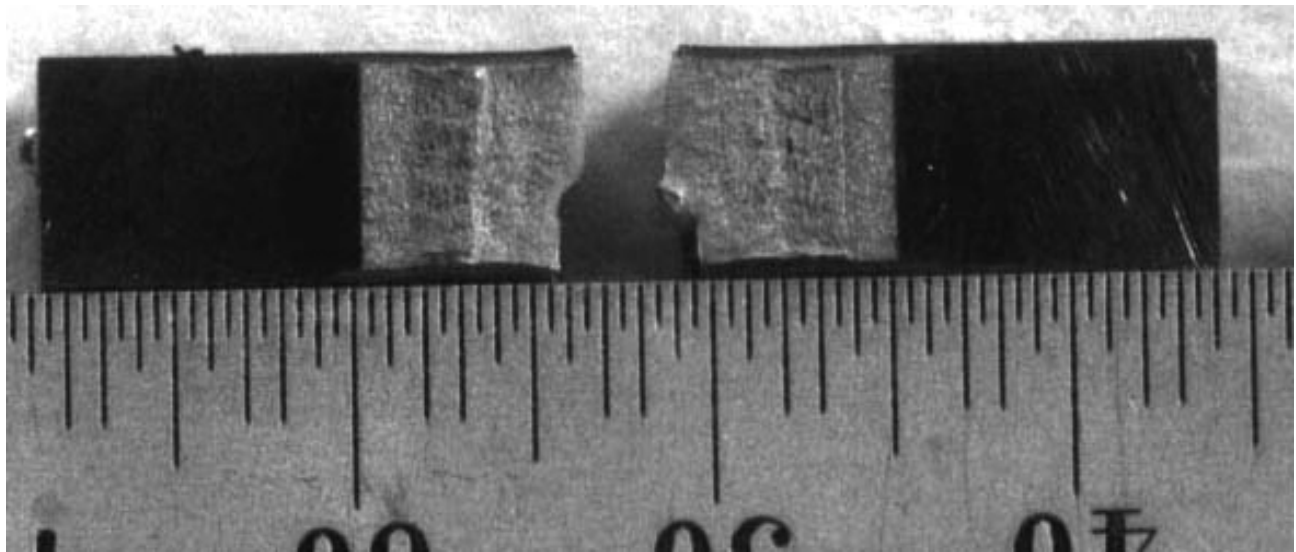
Fracture surface of specimen C19-C tested at 288°C
